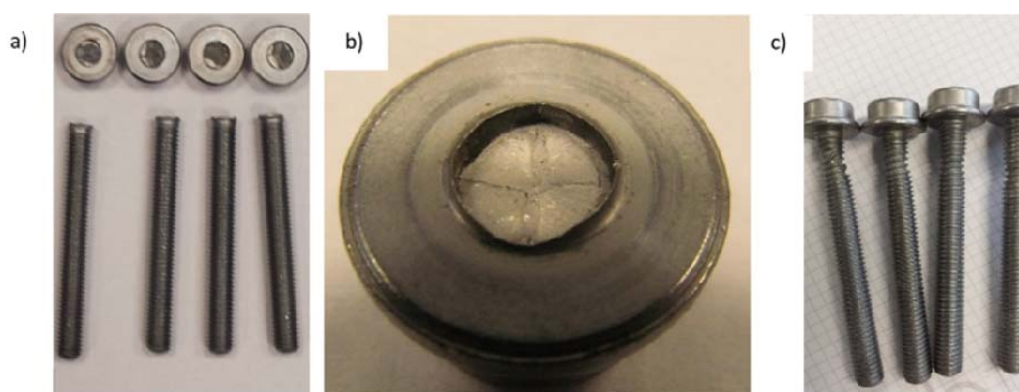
Examples of static tensile test results, (a) bolts with the defect, (b) damage to the bolt due to a defect, (c) bolts without defect
